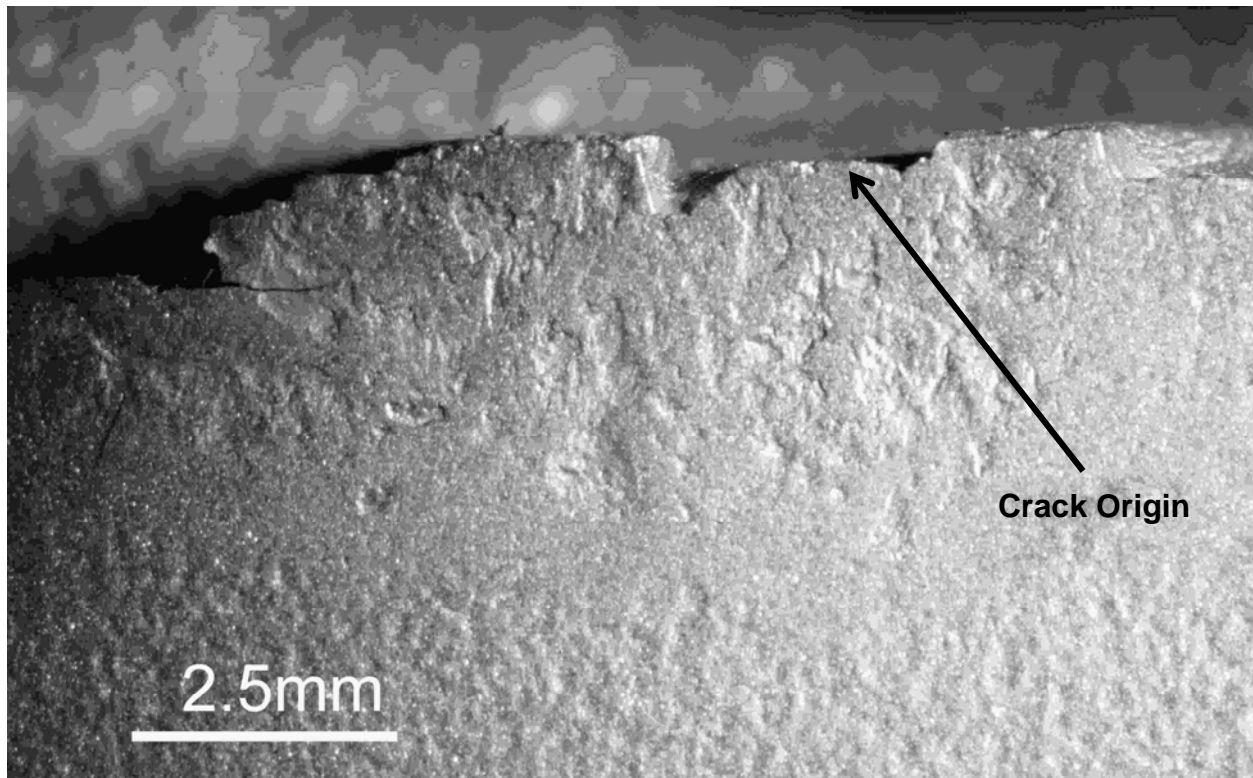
Shank Surface View of Crack Origin (PT0735)
